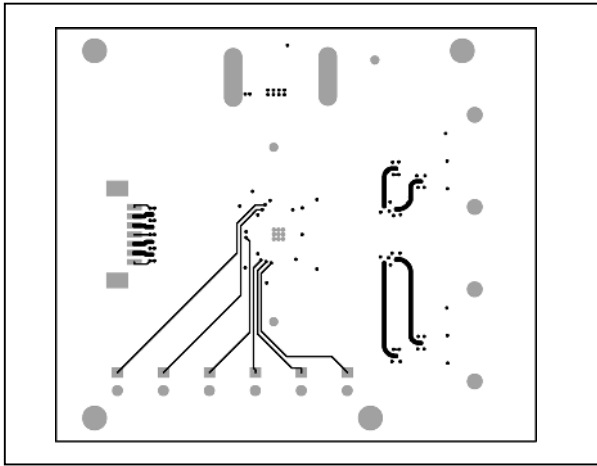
MAX3786 SATA EV Kit PC Board Layout—Solder Side
